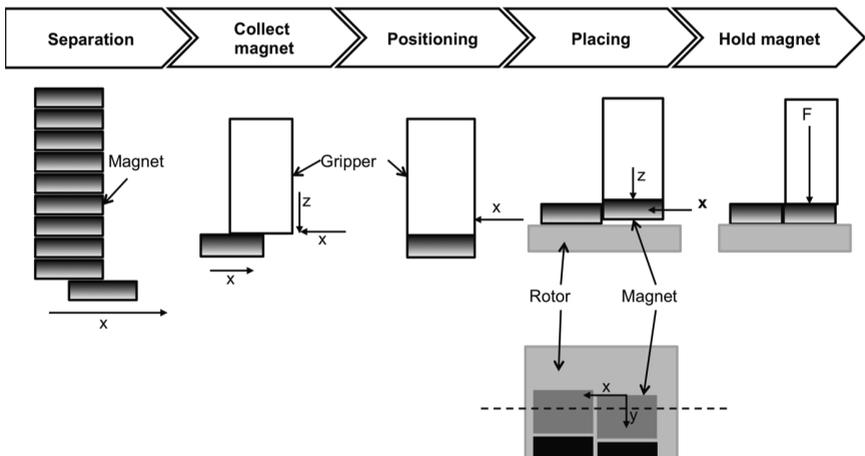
The kinematic model can be derived from the five process steps for magnetized magnet assembly.
